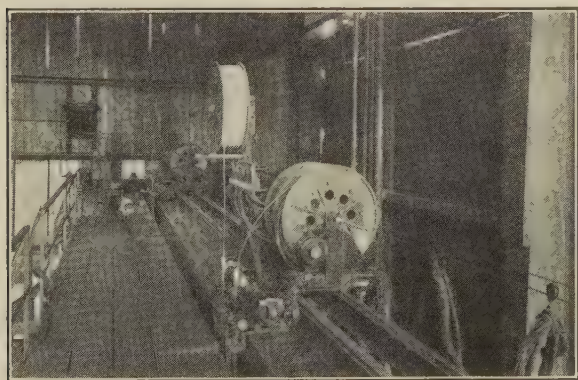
36-FT. PIPE WELDING MACHINE SHOWING TWO, TRAVEL CARRIAGES EACH WITH TWO WELDING HEADS FOR AUTOMATIC WELDING OF PIPE BY MULTIPLE ARC PROCESS
